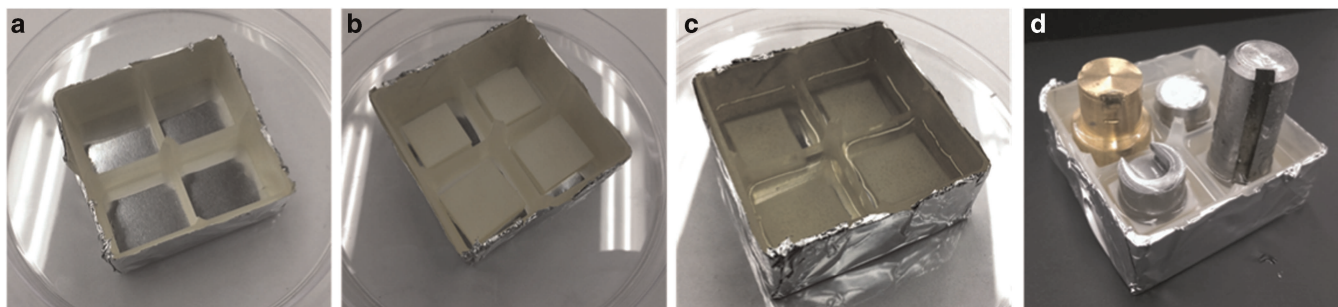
3D-printed molding containers and molding techniques. An empty molding container is (a) wrapped with aluminum foil to prevent PDMS leakage. (b) Molds are placed into the container and (c) PDMS is poured. (d) For double-sided molds, metal weights between 50–100 g are placed on the molds and the whole device is degassed.
